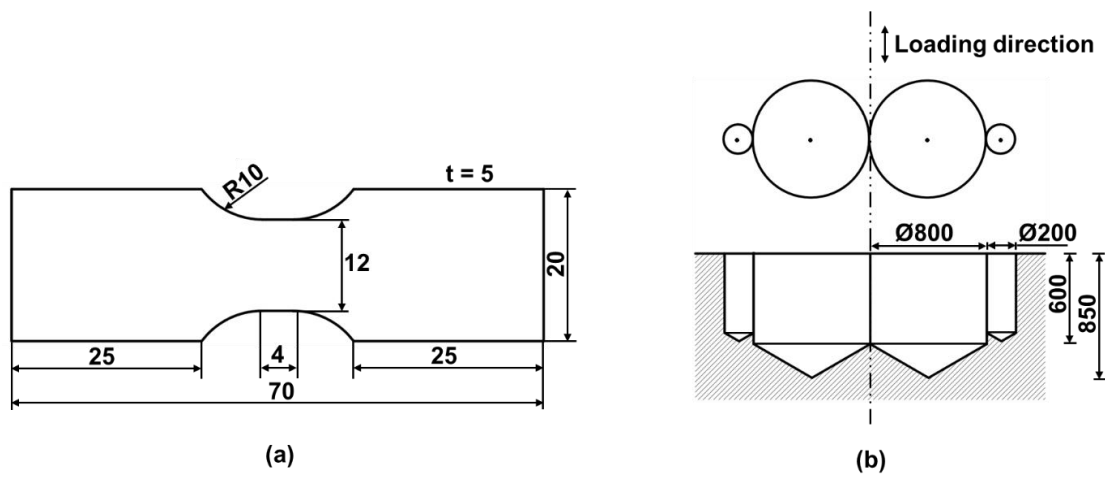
(a) Tension- compression test specimen geometry for long crack (all dimensions in mm), (b) artificial defect geometry for long crack (all dimensions in μm).
